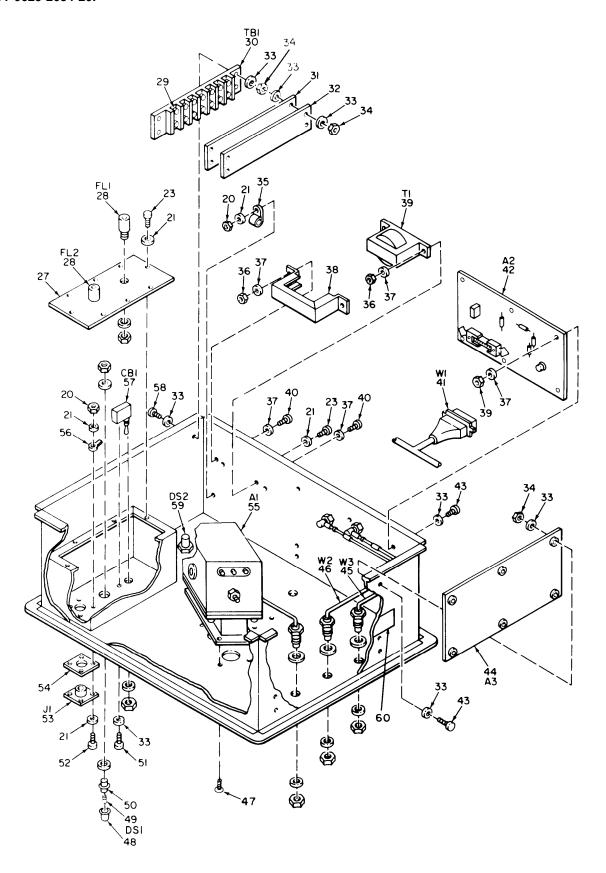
Elect Electronic Test Set Assembly (Sheet 2 of 2).
